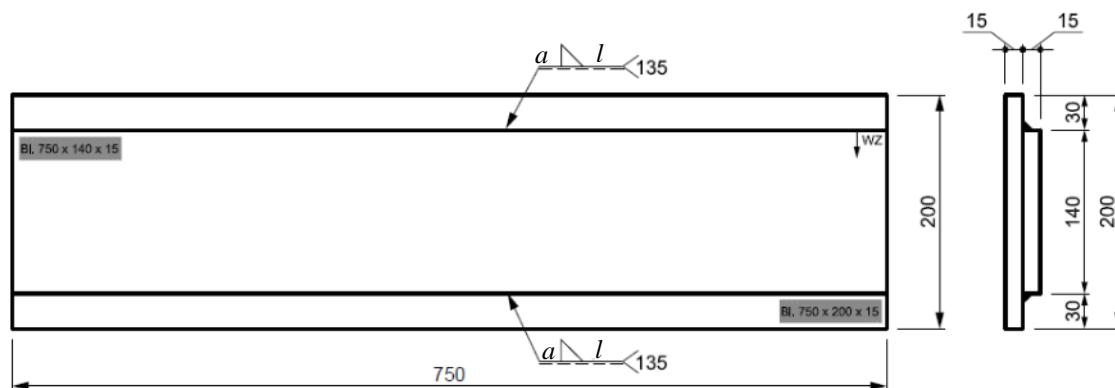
Longitudinal fillet lap-welded connection [13].
